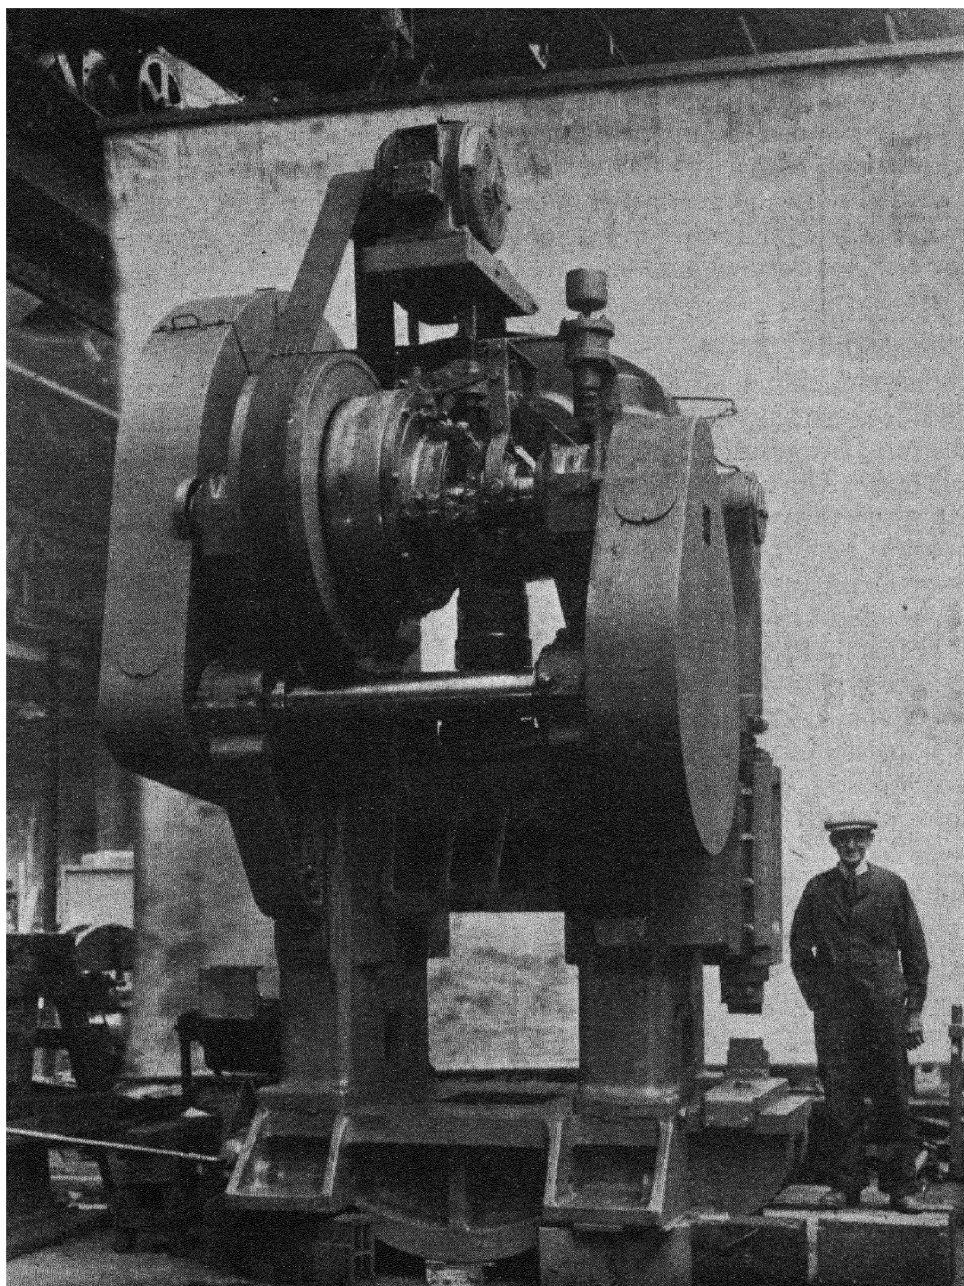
550-TONS TIE-BOLT TRIMMING PRESS
